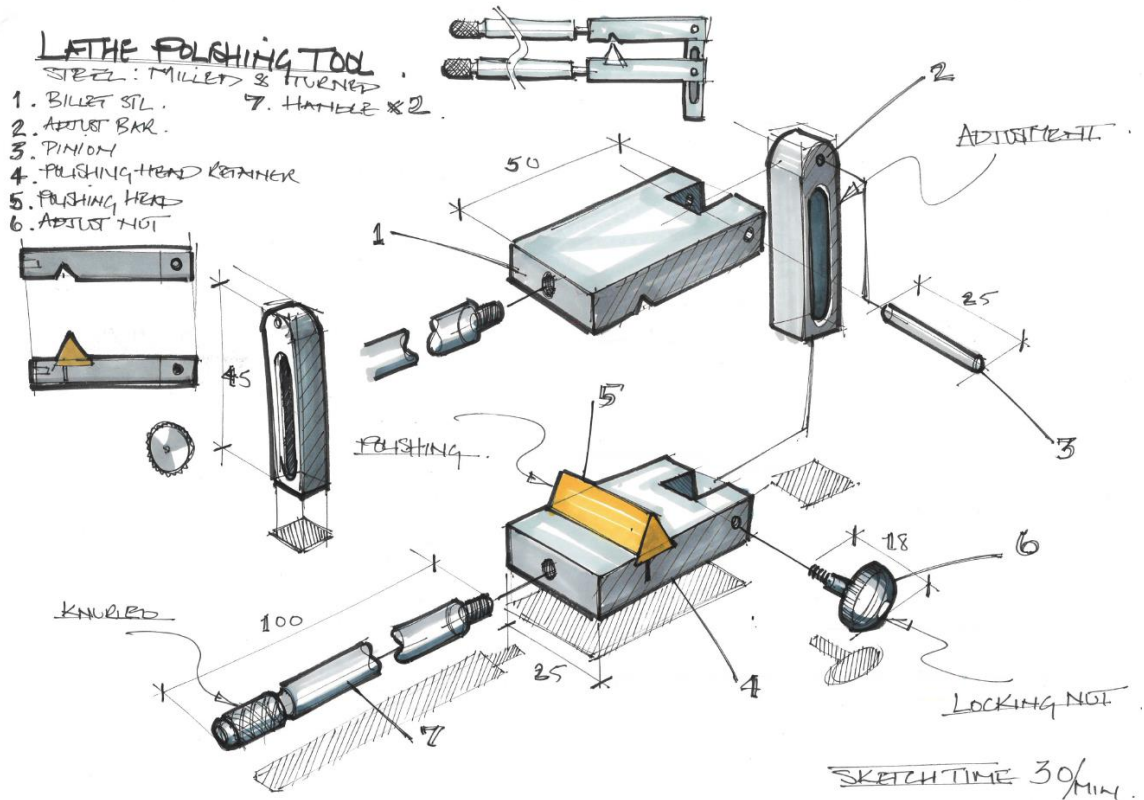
Example of an exploded sketch of a lathe polishing tool utilized for demonstration during design sketching classes. (Credit: Paul Kennea)
